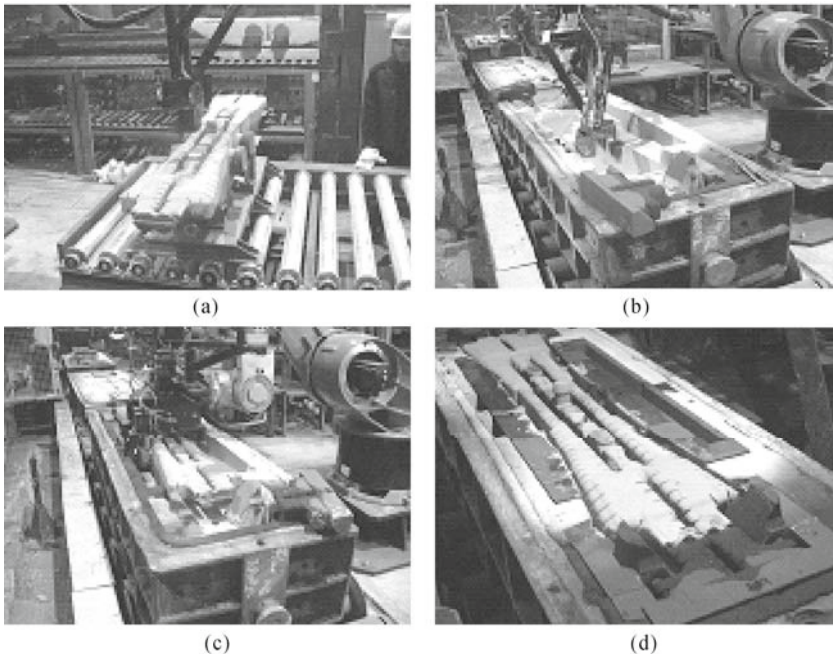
Process to assemble sand cores in sand boxes. (a) Scan of the sand core; (b) Scan of the sand box; (c) Sand core drop-down to the sand box; (d) Assembled sand mold
